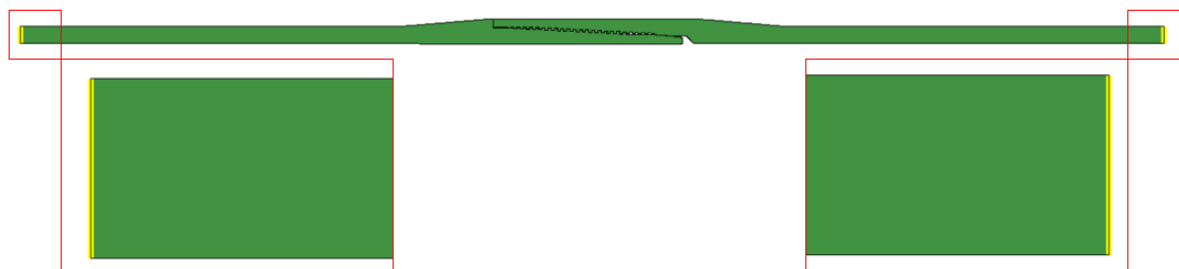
Axial Constraint surfaces on Pin and Box – Example
